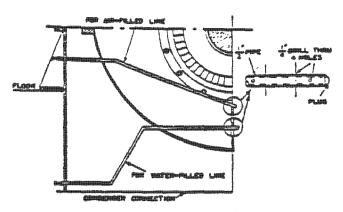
Section through low-pressure turbine bowl showing pressure top installation
